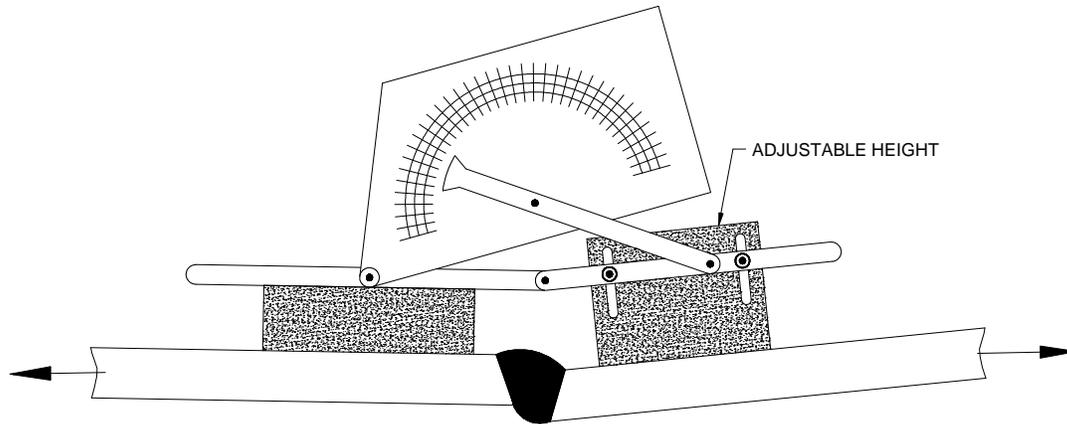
Modified Protractor for Measuring Angular Misalignment
